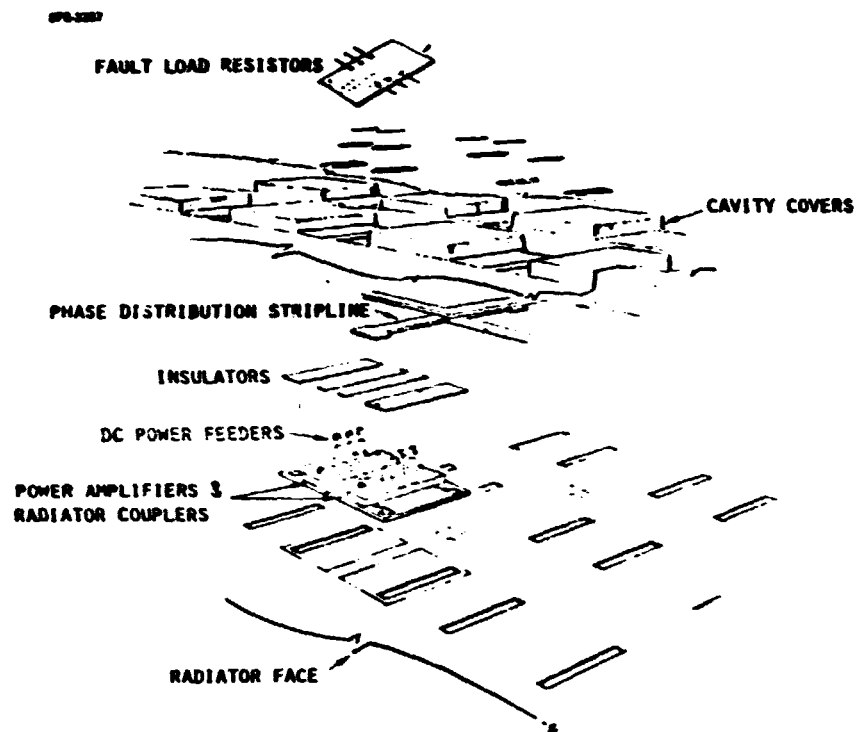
Revised Solid State Cavity Radiator Module - Exploded View
